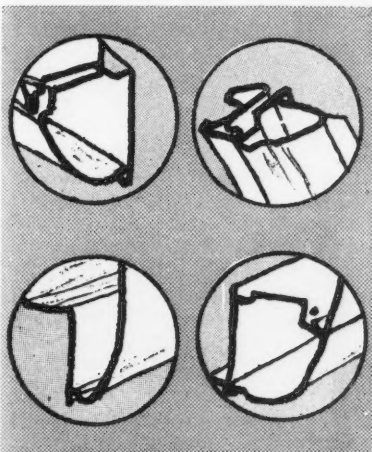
Cross-section views taken from a catalog on a 1961 model American compact car illustrate the closed box sections on the unitized body in which moisture, dust and other contaminants can be collected to form highly destructive corrosion poultices.
